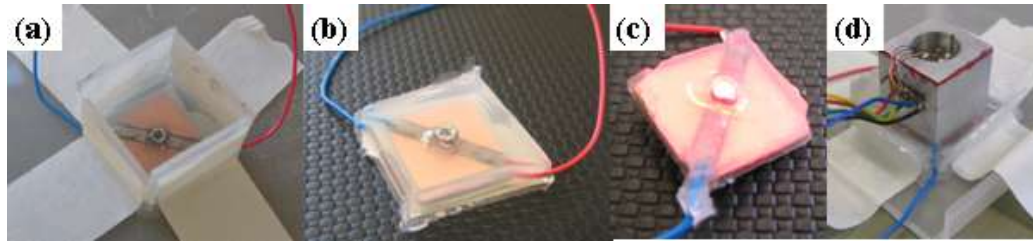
The production steps for Prototype A: a) the PVA mould used to contain the silicone compound to be cured, b) the cured assembly, c) with the excess trimmed and d) the whole assembly bonded onto the transducer housing with another layer of silicone compound.
